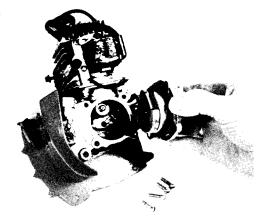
Removing/Installing Bearing Carrier and Flywheel Half of Crankshaft
